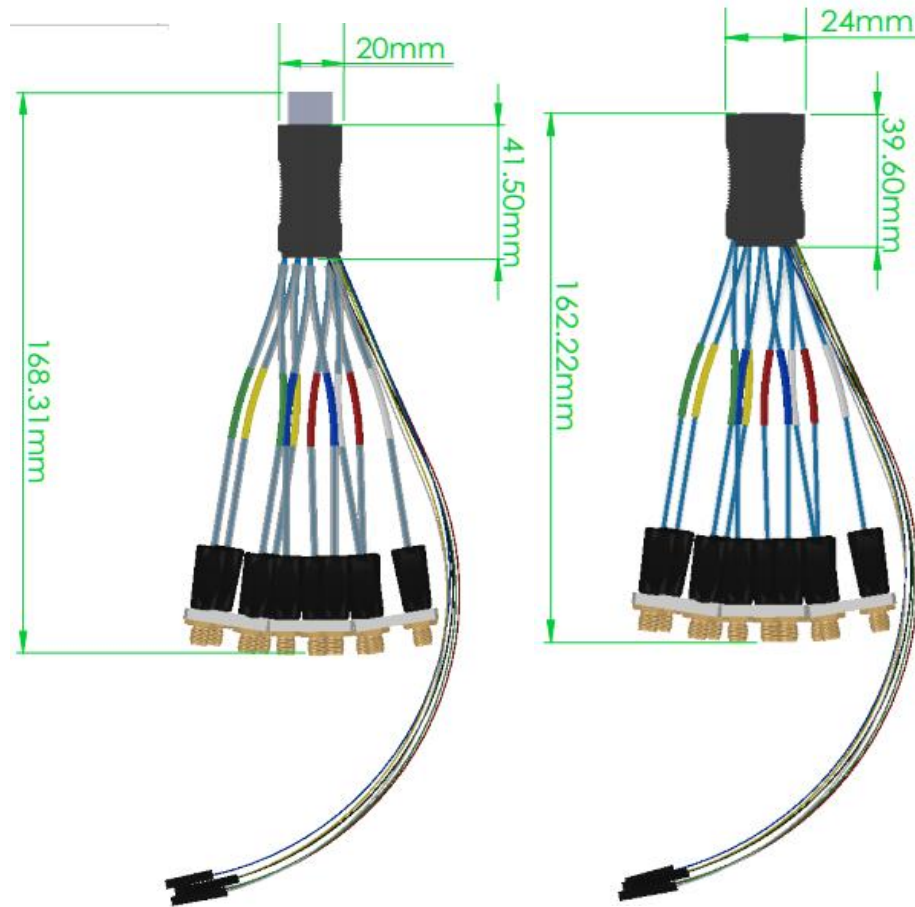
HDMI 2.1 Type-A Plug Fixture & HDMI 2.1 Type-A Receptacle Fixture
